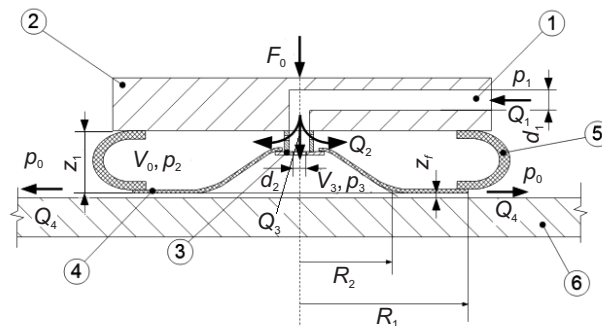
Cross-sectional diagram of the cushion: 1 – inlet channel, 2 – bearing plate, 3 – outlet nozzle, 4 – bearing surface of a bellow, 5 – side surface of a bellow, 6 – substrate
